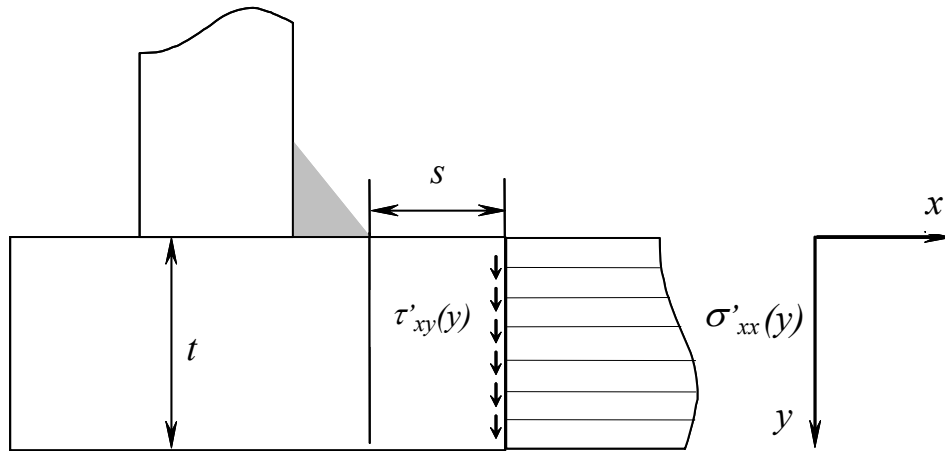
Stress components at the weld toe in the thickness direction
